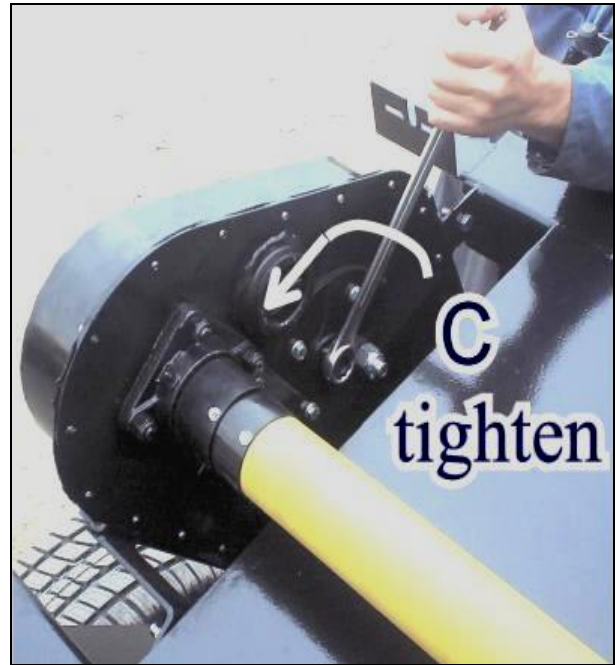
ROTATING ECCENTRIC TIGHTENER
